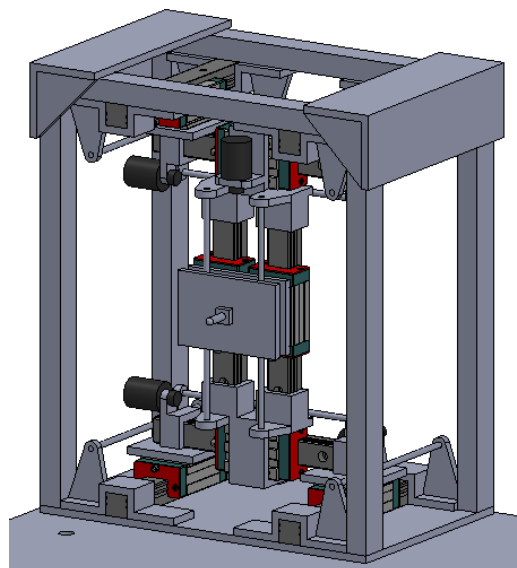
The initial design of the wear tester with multiple profile rail guides and stepper motors.
